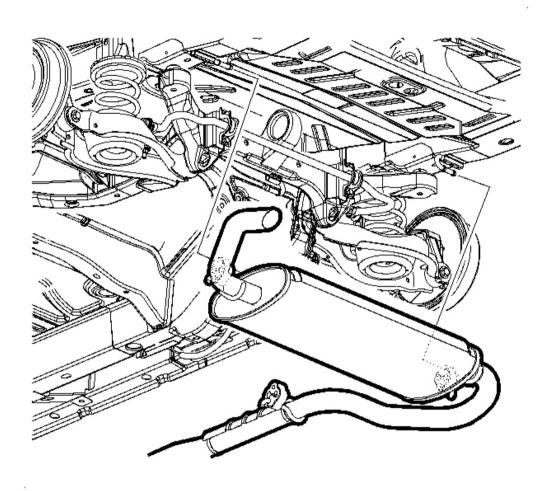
Exhaust Muffler & Resonator Assembly Courtesy of GENERAL MOTORS CORP.
